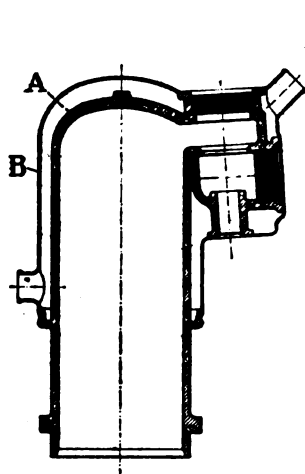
Section of Cylinders of E.N.V. Engine.
